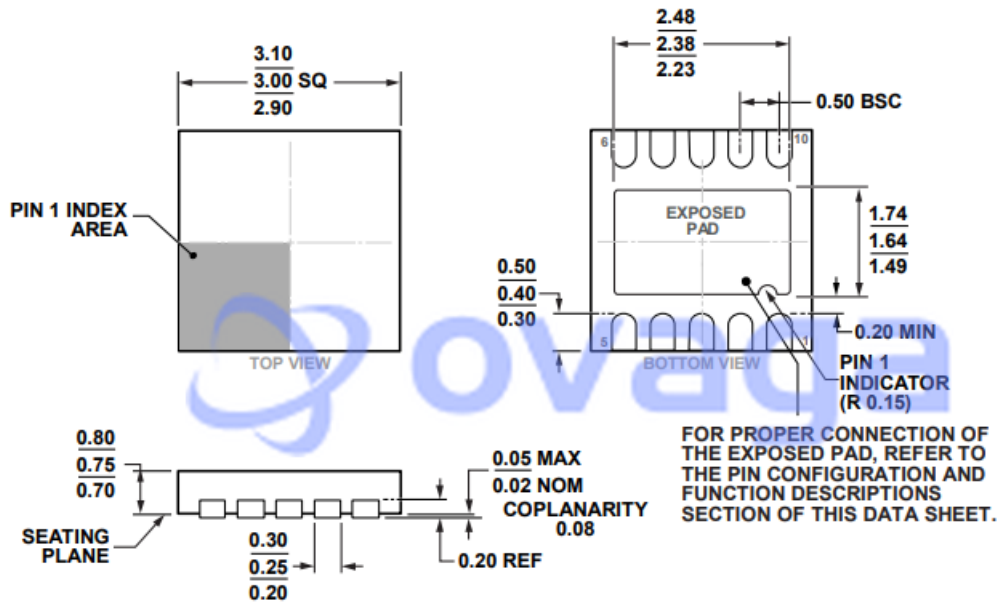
10-Lead Lead Frame Chip Scale Package [LFCSP_WD]
